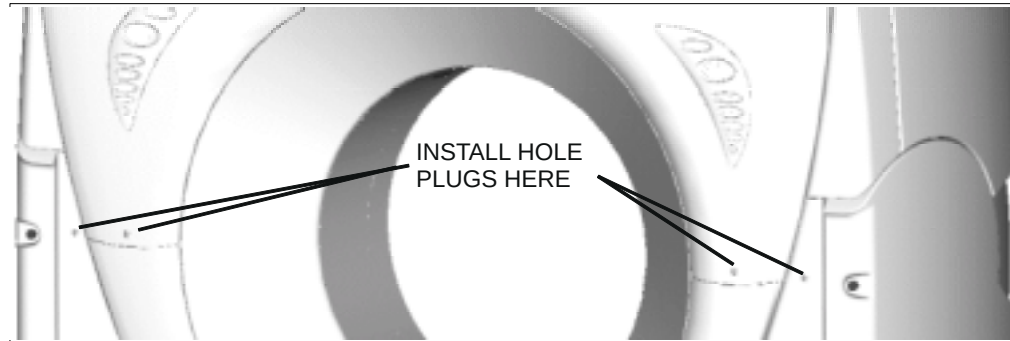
FRONT HOLE PLUG INSTALLATION
